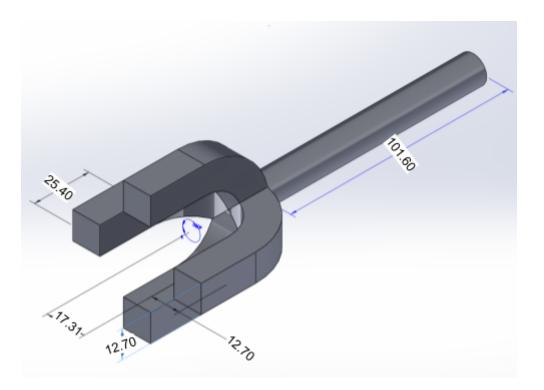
SOLIDWORKS DC Motor Attachment with dimensions shown in mm
